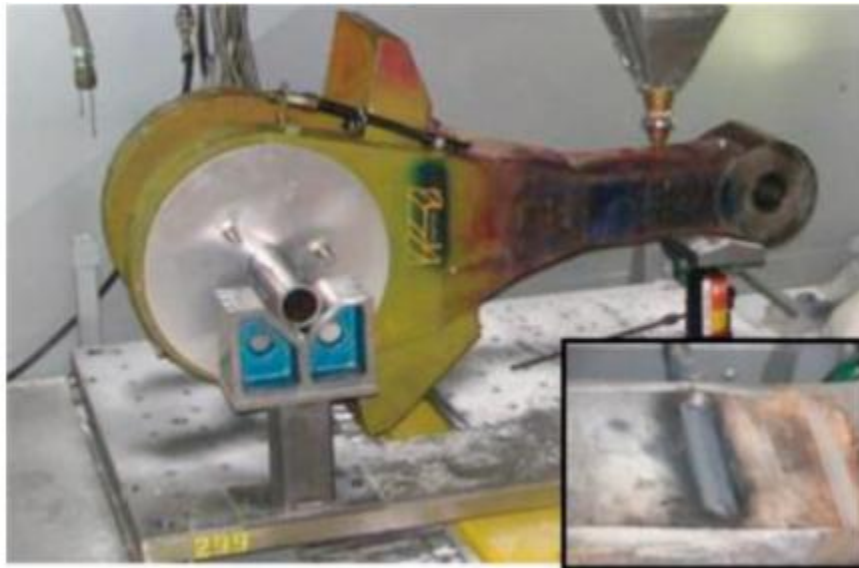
A large casting from a stamping press that developed cracks was repaired using DMD. The right bottom area shows the cracked area that was machined back after DMD deposited steel was added to the crack site⁶.
